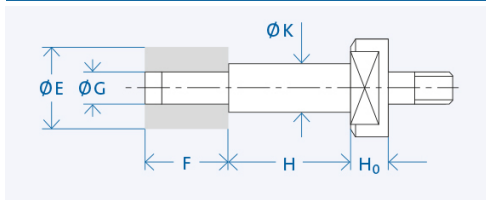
WITH ADJUSTMENT SCREW (PS)
